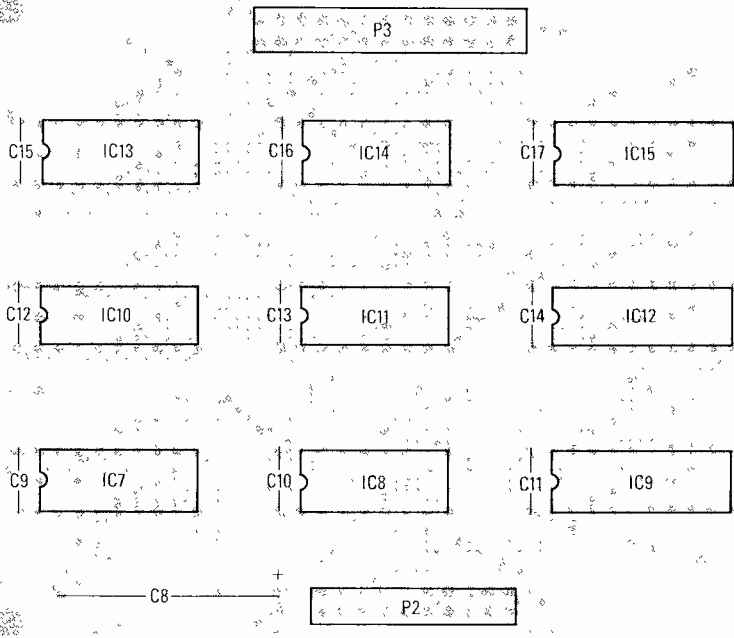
STUFF THE DRIVER BOARD as shown here. Mount all parts on the component side of the board.
